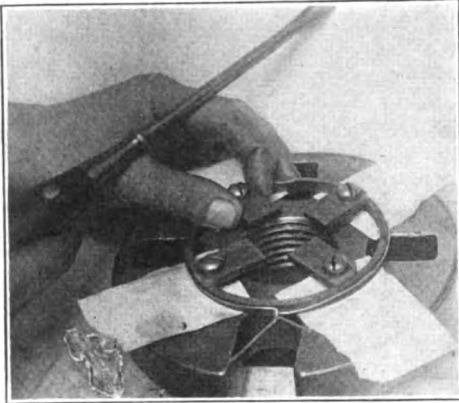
Clamping Compressed Ring on Lathe Face Plate With Small Steel Clamps.
